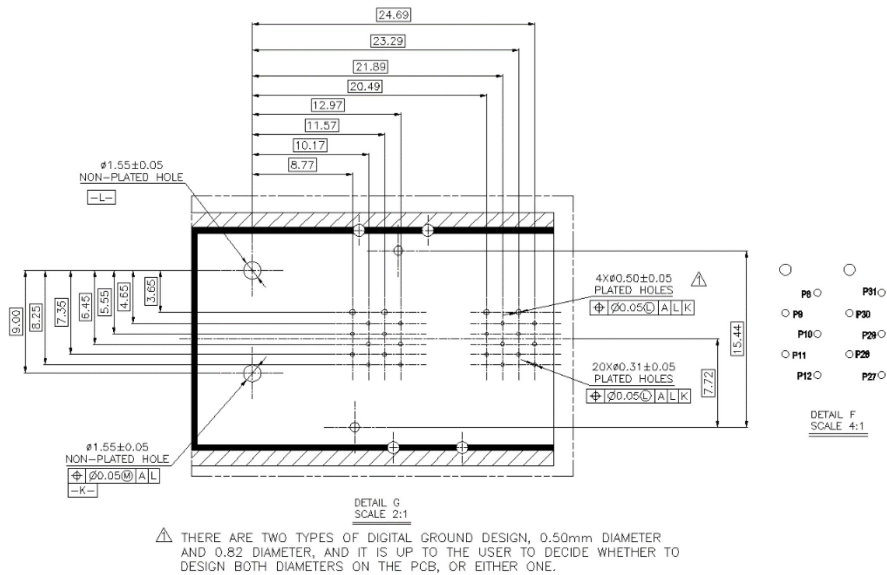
QSFP112 Qpath112 2X1 Connector and cage PCB layout
